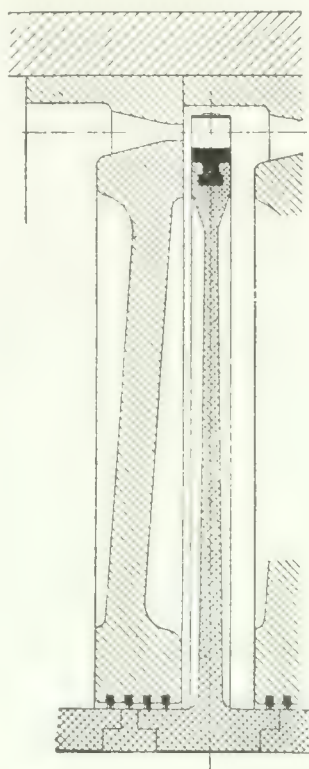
Runner and Guide Wheel of Zoelly Turbine.
